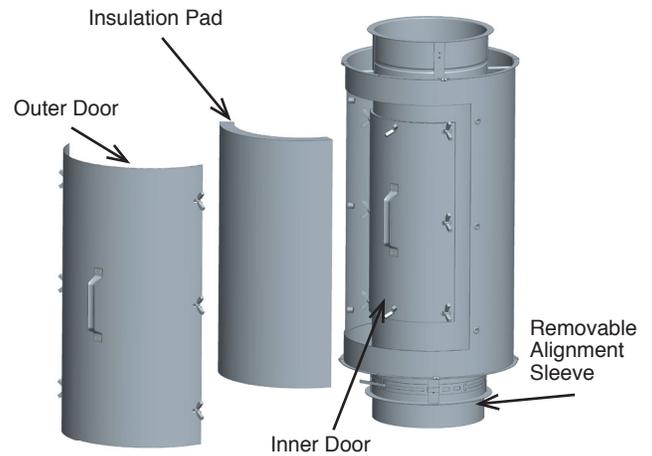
Step 1-3 of Removal for Inspection for the ADL
